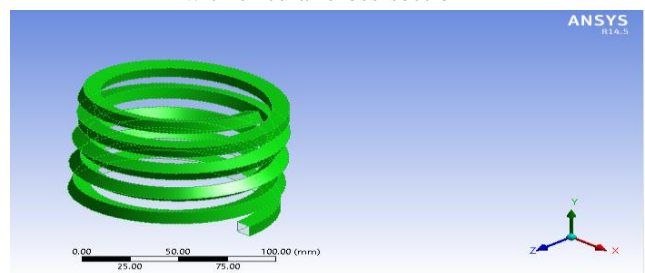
Modeled view of helical coil heat exchanger with rectangular cross-section
